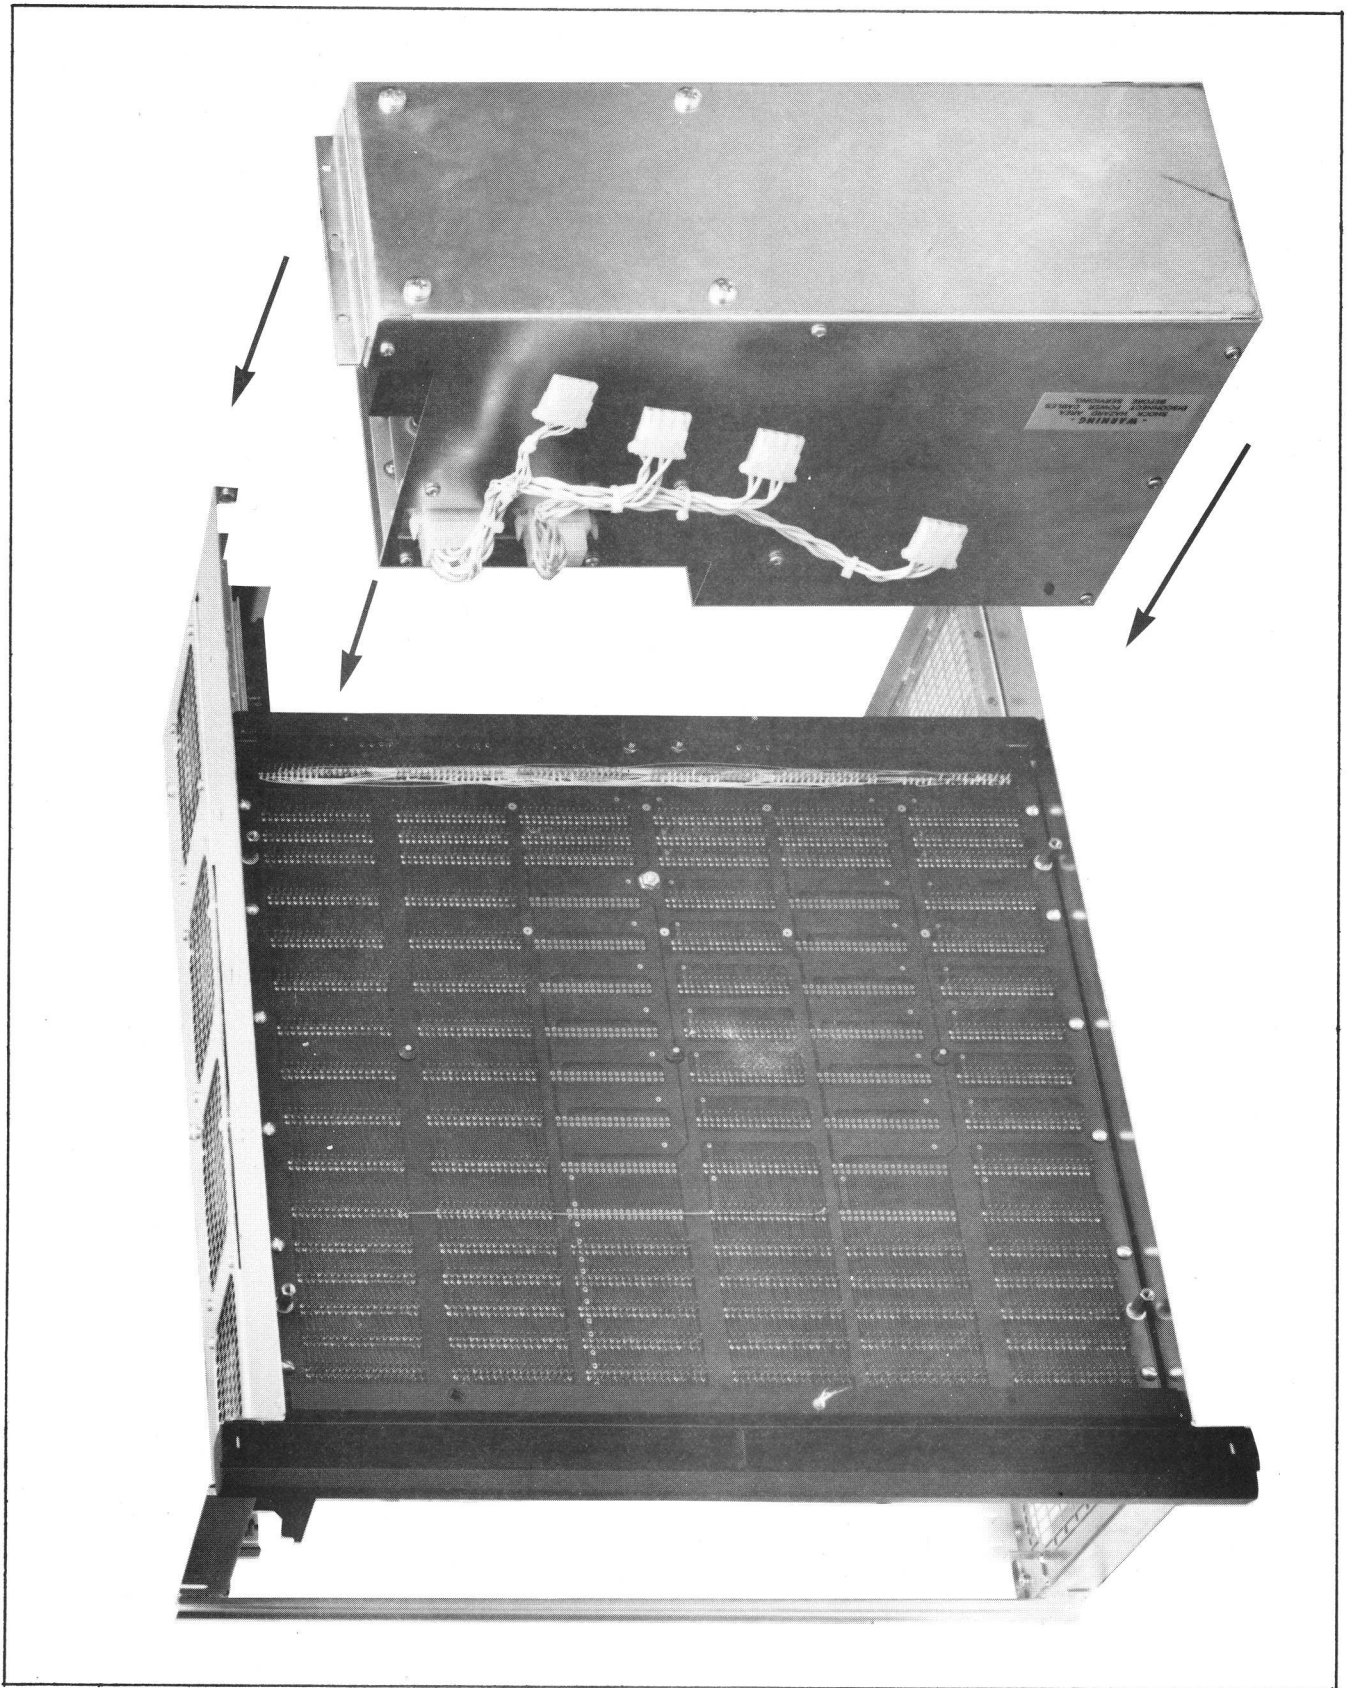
Installation of the Model 36 Power Supply in a PDP-11 Chassis
